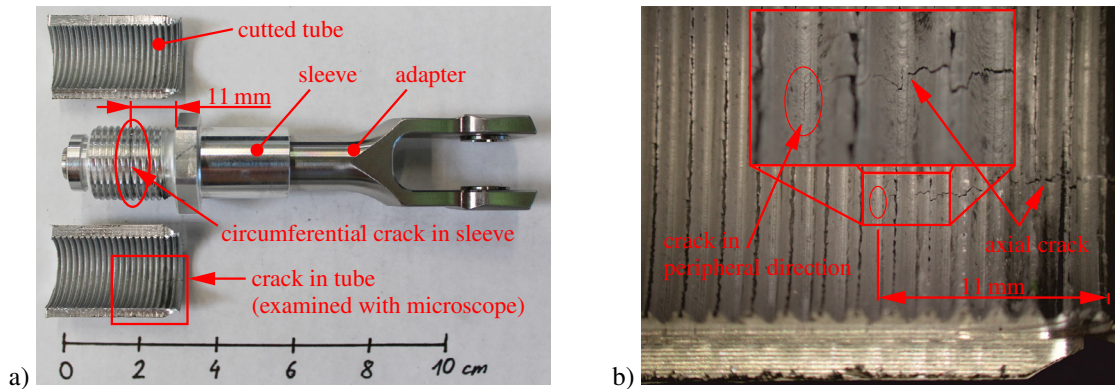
Crack investigation with stereomicroscope Olympus SZX10, a) threaded connection cut open, b) crack in tube (female thread) with detail of crack tip.
